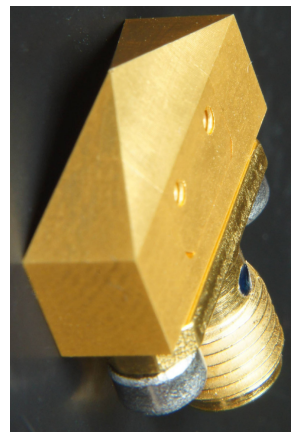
A small housing with an SMU connector for assembling a microdetector with a circuit and a probe.
